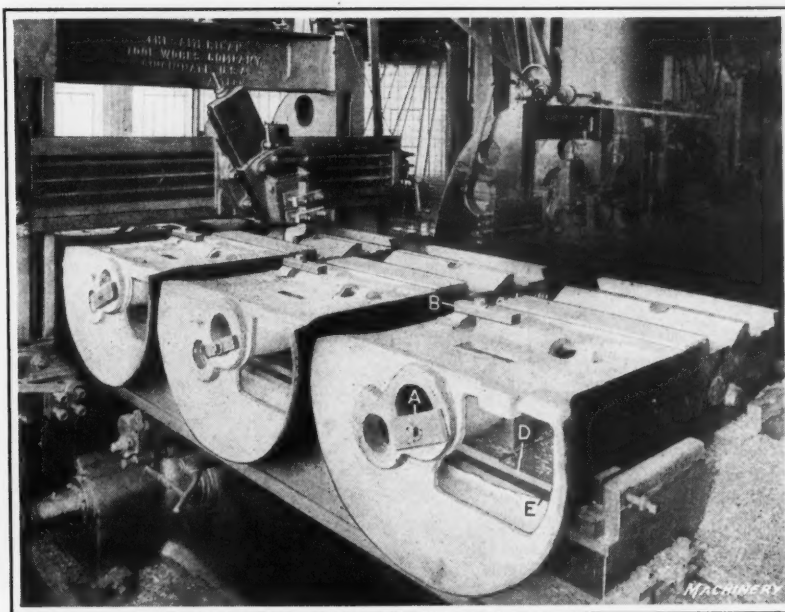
Planer equipped with a String of Fixtures for supporting Castings for Radial Drill Heads while planing the Arm Bearing and the Tapered Gib Seat
